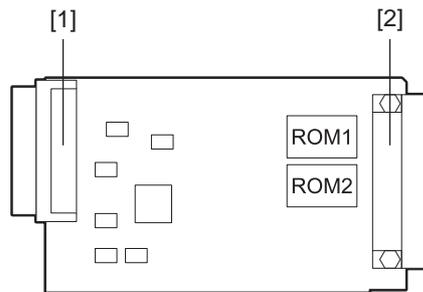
Jig board: PWA-DWNLD-350-JIG1 (16MB)
